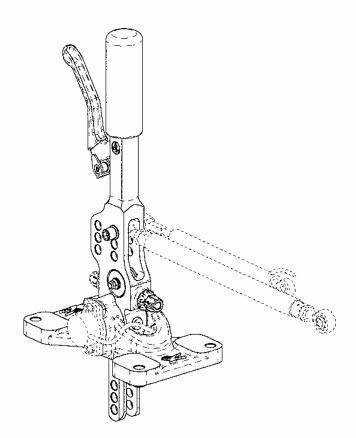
The Xtrac '420' In Car Gearlever Assembly
